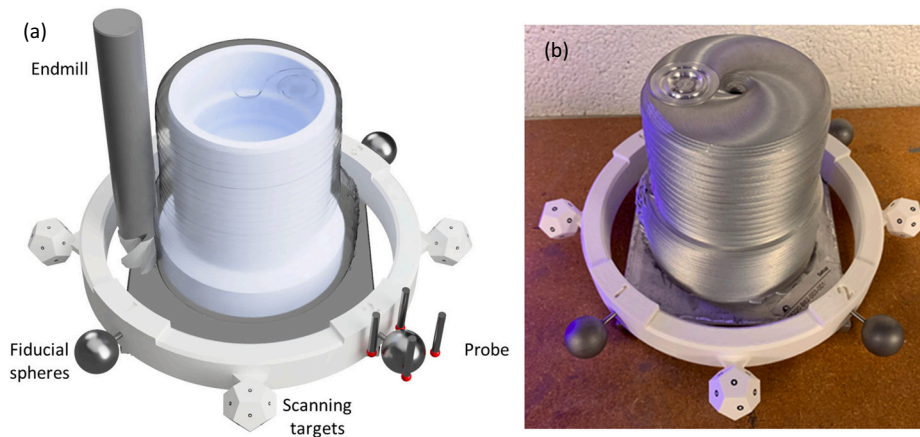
(a) Design for the external fiducial frame. The frame was designed to provide clearance for machining and probing operations so it could remain in place during machining. (b) The fiducial frame was attached to the preform build plate using adhesive.
